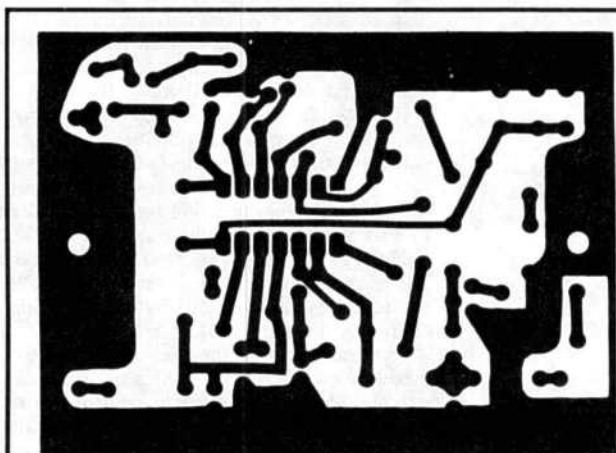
ALC PCB DESIGN - ACTUAL SIZE.
